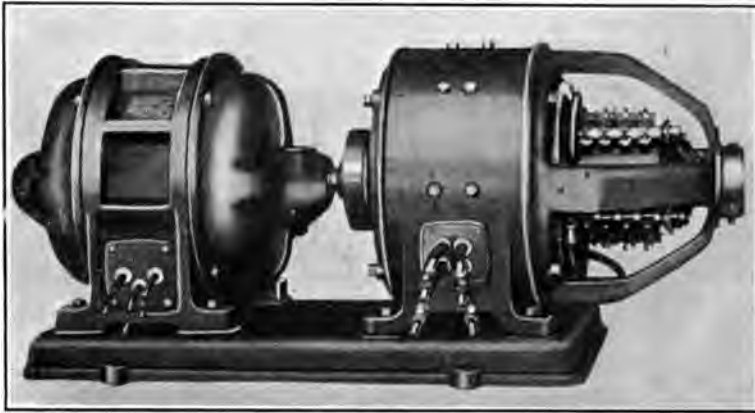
COMPLETE UNIT FOR ELECTRIC ARC WELDING.
